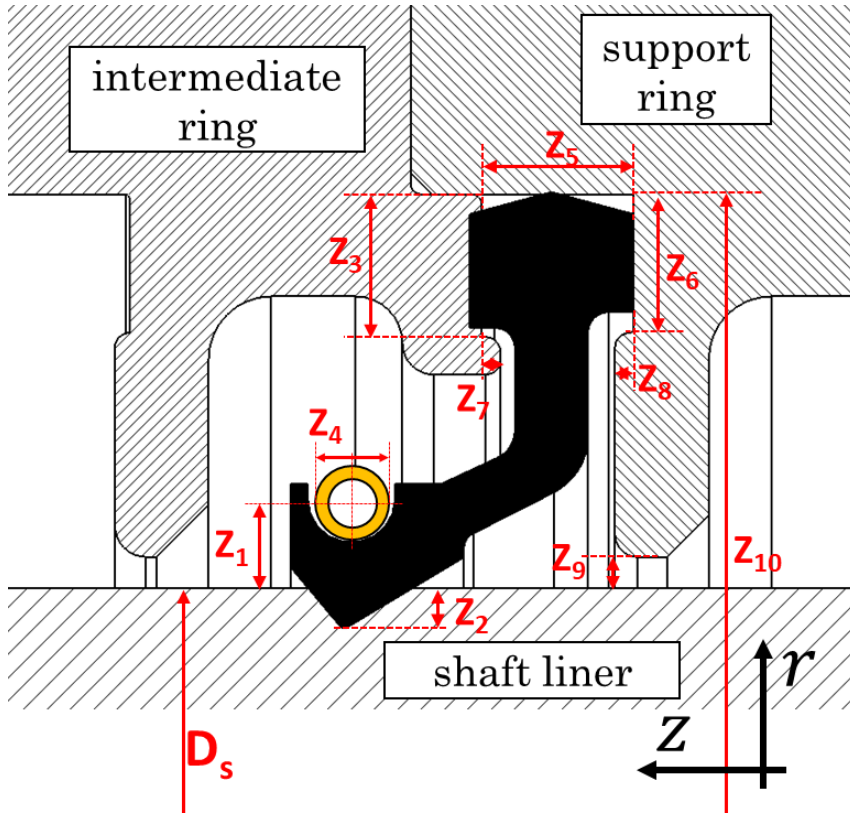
Geometry of the surrounding hardware: shaft liner, garter spring and housing parts.
